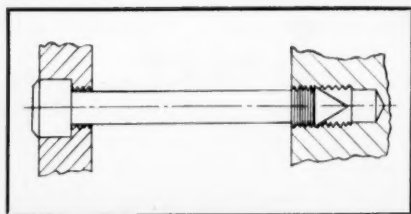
In this design, the screw is pointed to a 60-degree included angle so that the point tends to lead the threads on the screw into the tapped hole.
